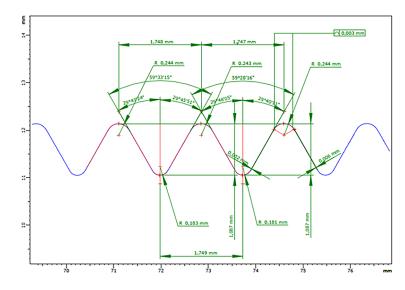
Geometric profile and shape of the tooth for the required diamond dresser
